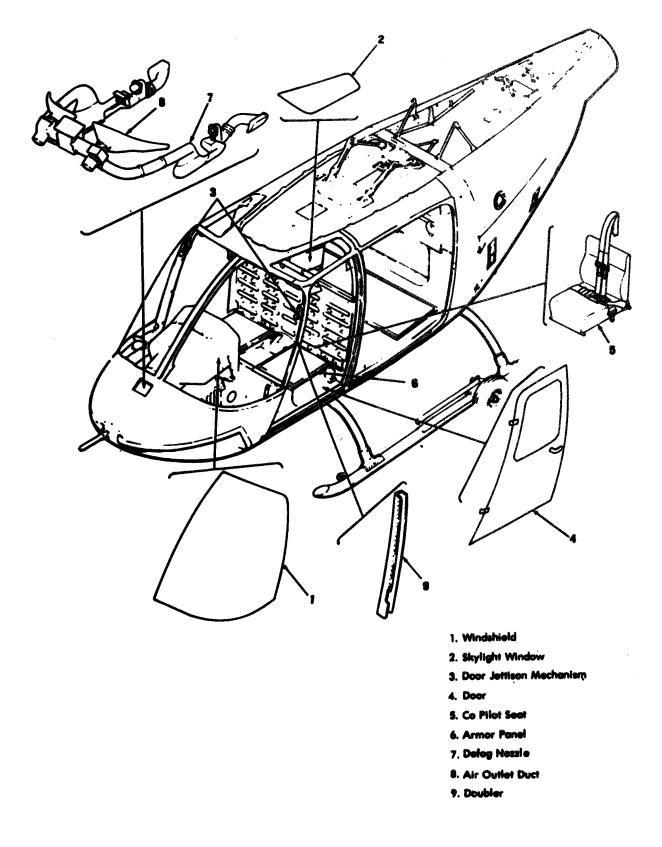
Door Frame/Windshield Frame Assy Repair (Sheet 1 of 4)
